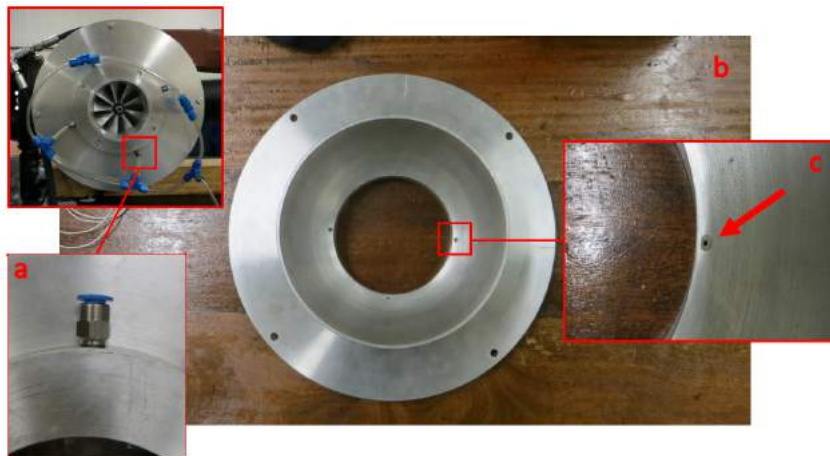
Impeller Pressure Tap Holes a) Festo Pressure Fitting b) Impeller outlet pressure tap hole inside of diffuser shroud (Point 8 - Figure 4.2 & Figure A.3) c) Enlargement of pressure tap hole
